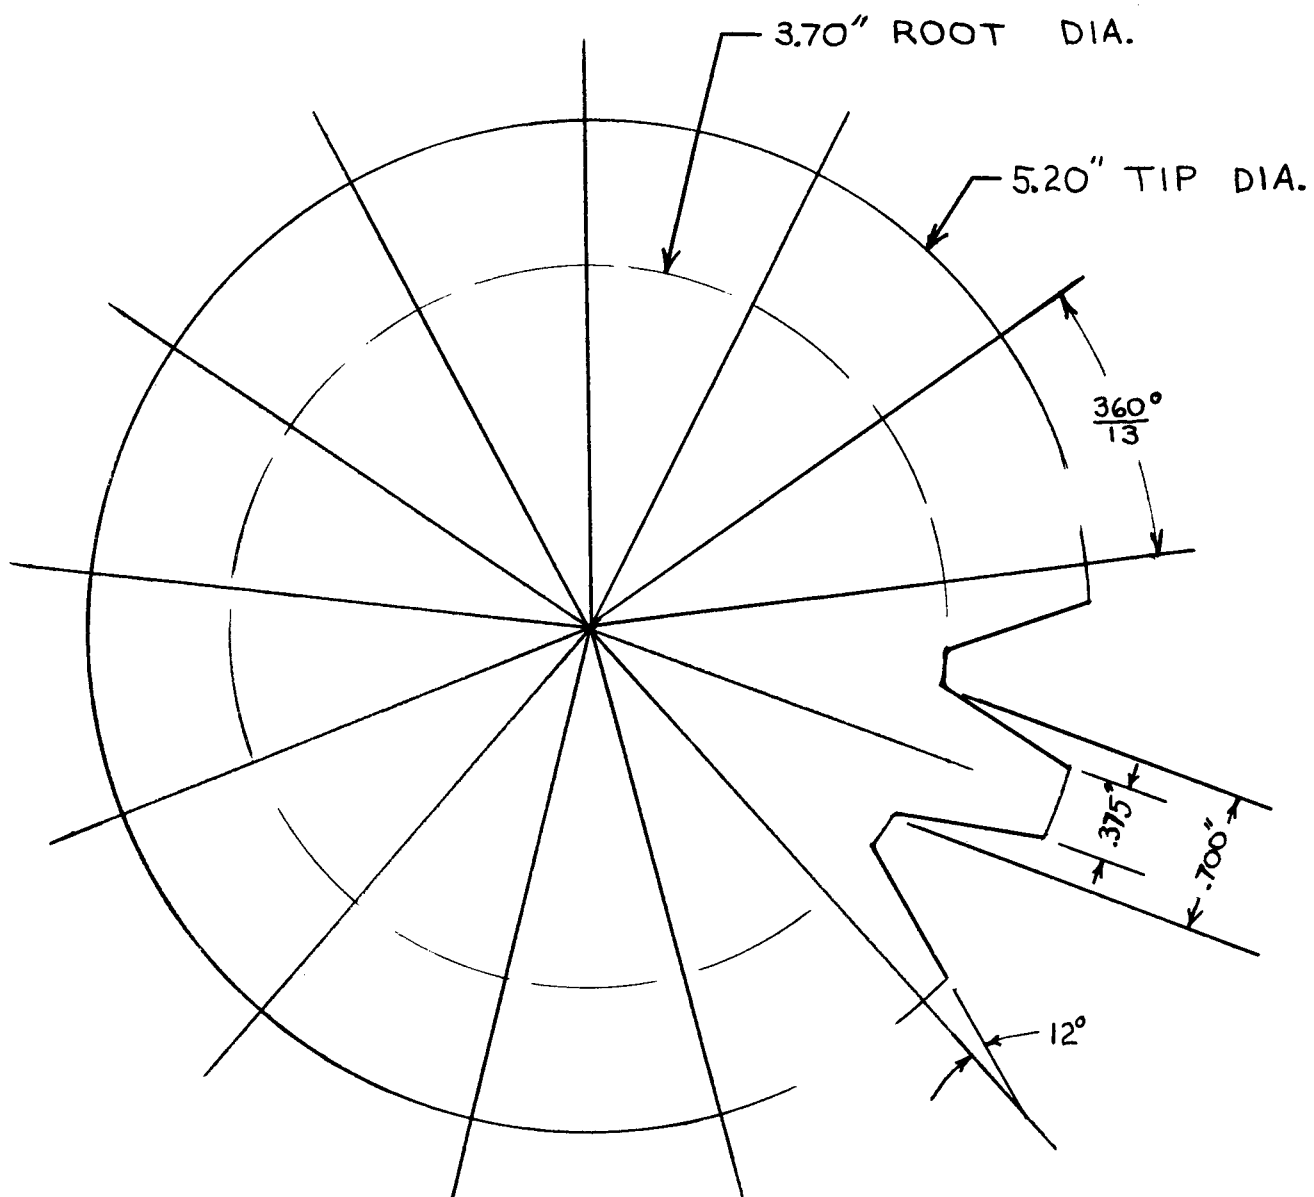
Cross Section of Preform Cavity in Rubber Bag Mold for CIP
